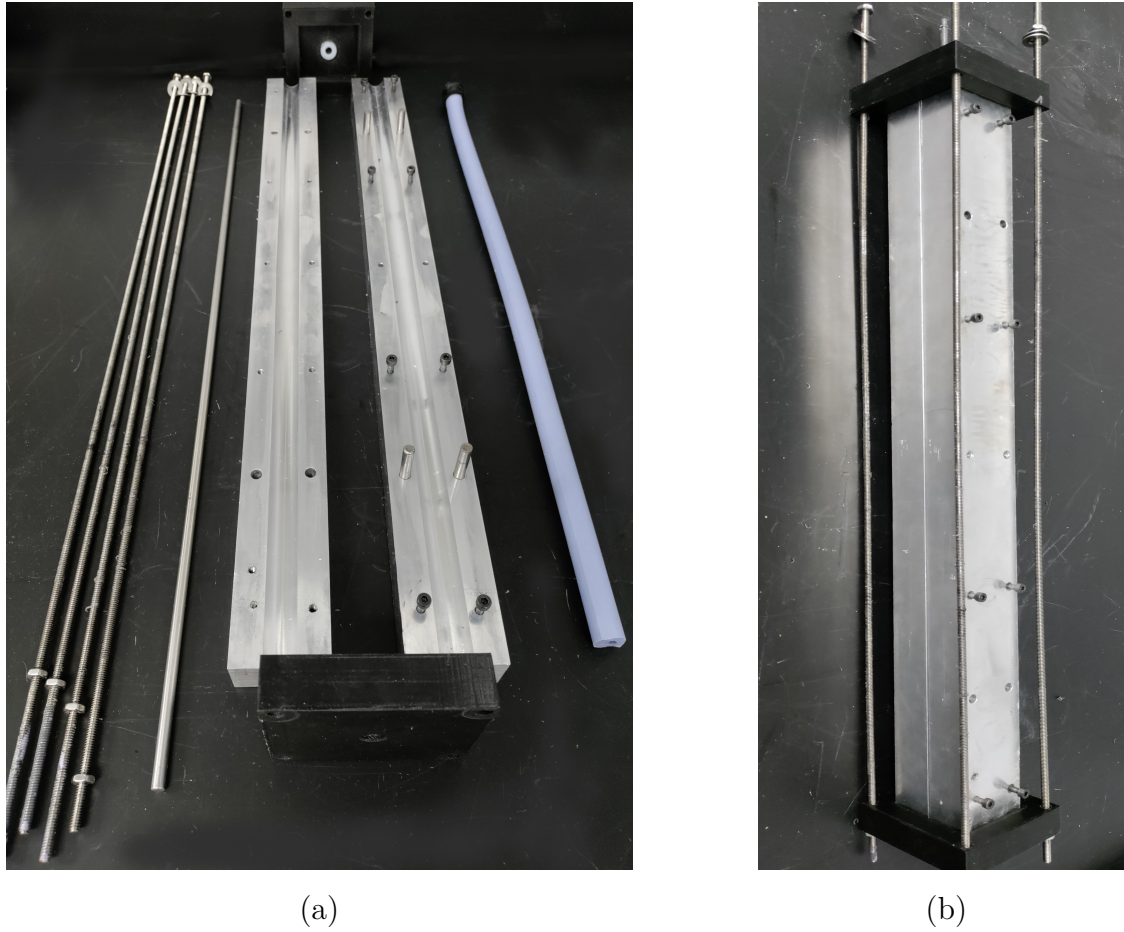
(a): Different components of the mould with, from left to right: the threaded rods, the centring rod, the aluminum and PLA parts and the pipe. (b): Assembled mould.
